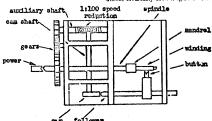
, Solenoid Winding Machine with Spring-loaded Cam Follower.
